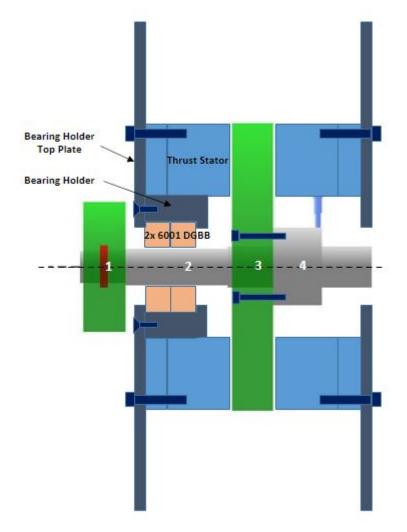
DE Backup Bearings: Double Row Deep Groove Ball Bearings $(2 \ge 6001)$
